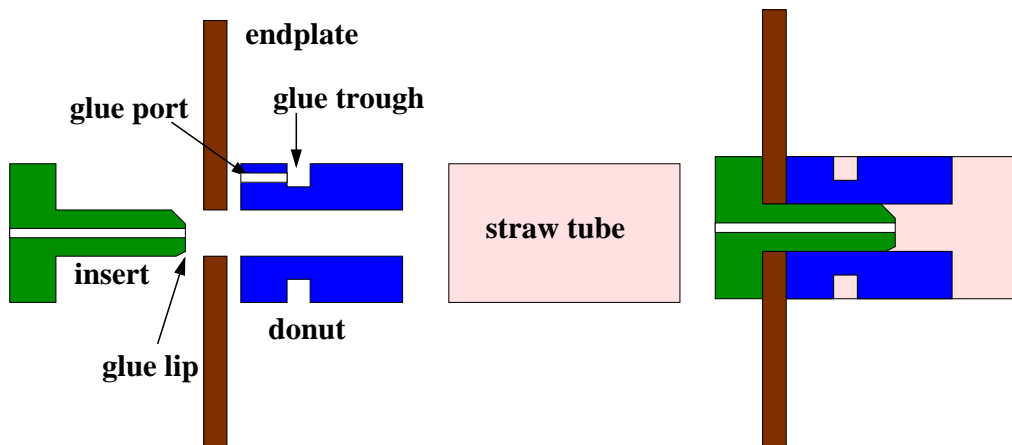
The CMU designed feed throughs which provide a solid glue joint between the straw-tube and the end plate. The left-hand figure shows an expanded view, while the right-hand shows the feed throughs in the chamber end plates.
